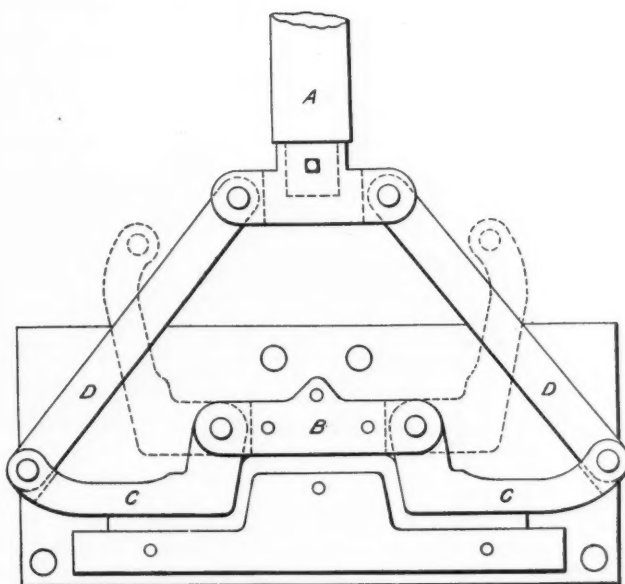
Tool for Making Wedge Bolt Keepers. Perritt.
